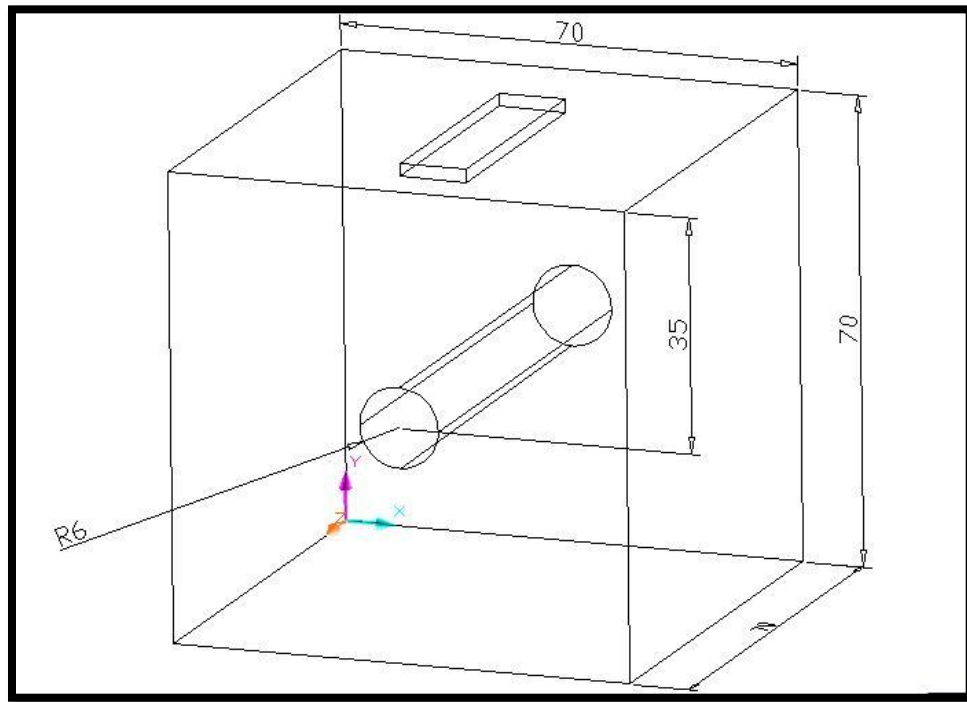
3D view for Dimension of Circular shape cross-sectional cooling channels
